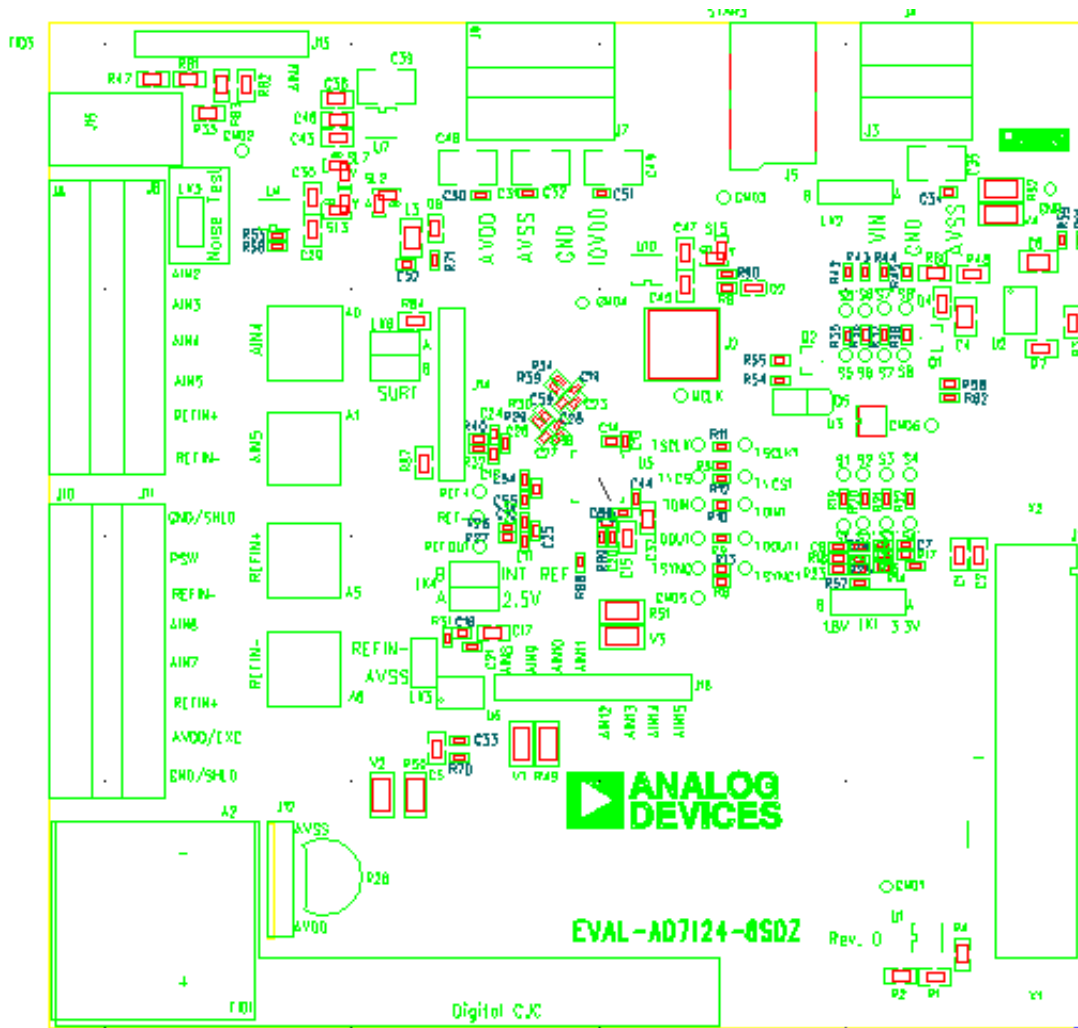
Top Printed Circuit Board (PCB) Silkscreen
